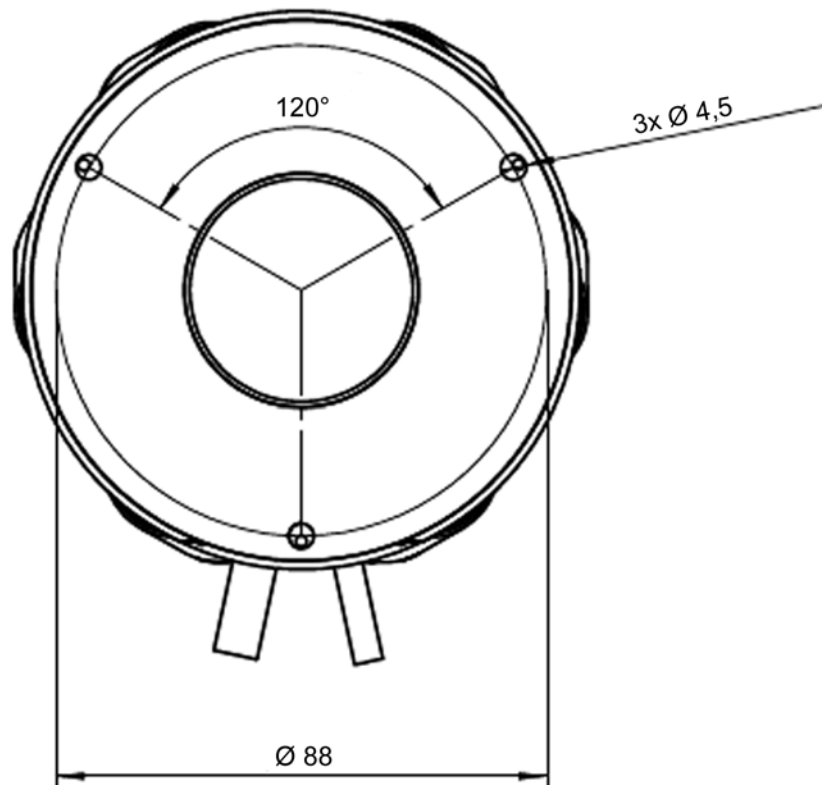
Base plate of the H-810 Hexapod with mounting holes, top view (dimensions in mm)
